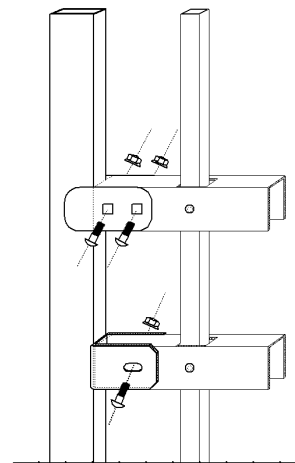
Refer to steps 6 & 7 of the instructions for rail mounting instructions
